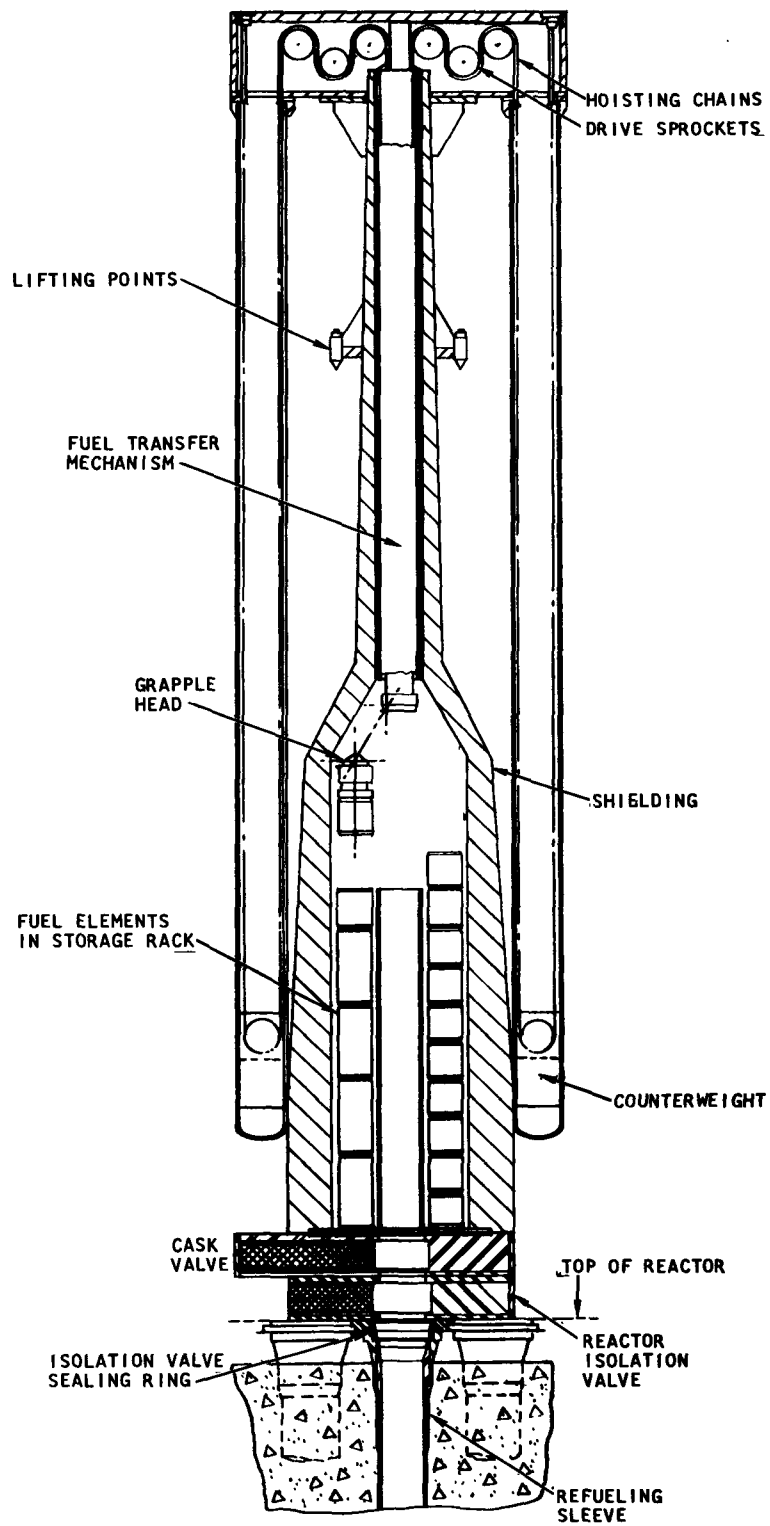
Fuel-Handling Machine for Backup Design. (GGA illustration)
